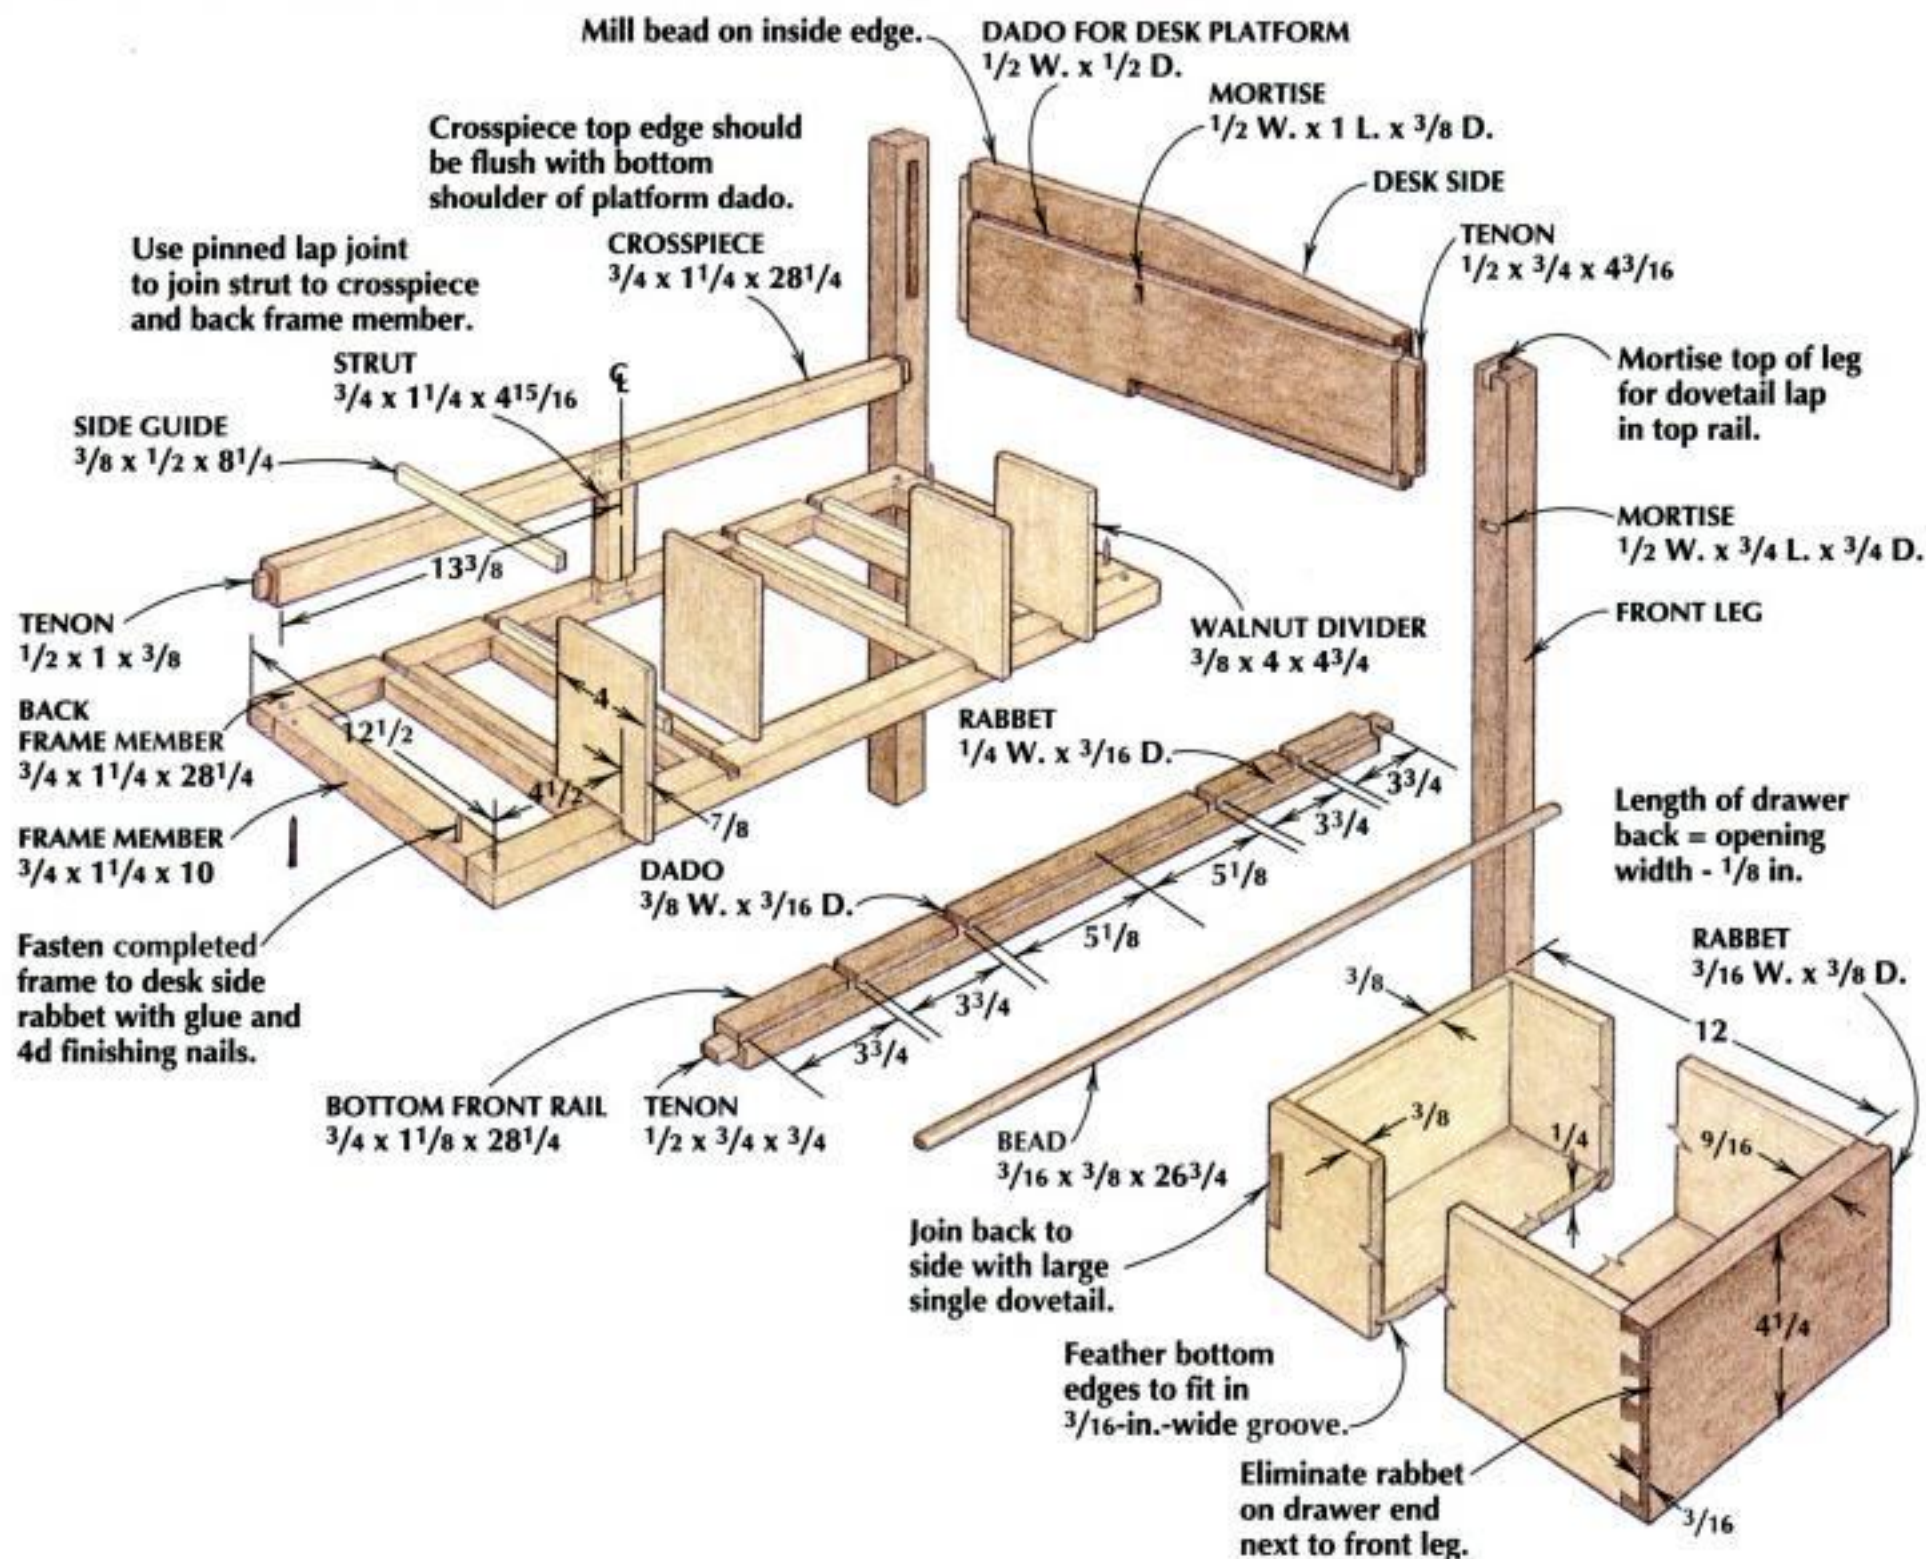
DRAWERS & DRAWER GUIDE ASSEMBLY
